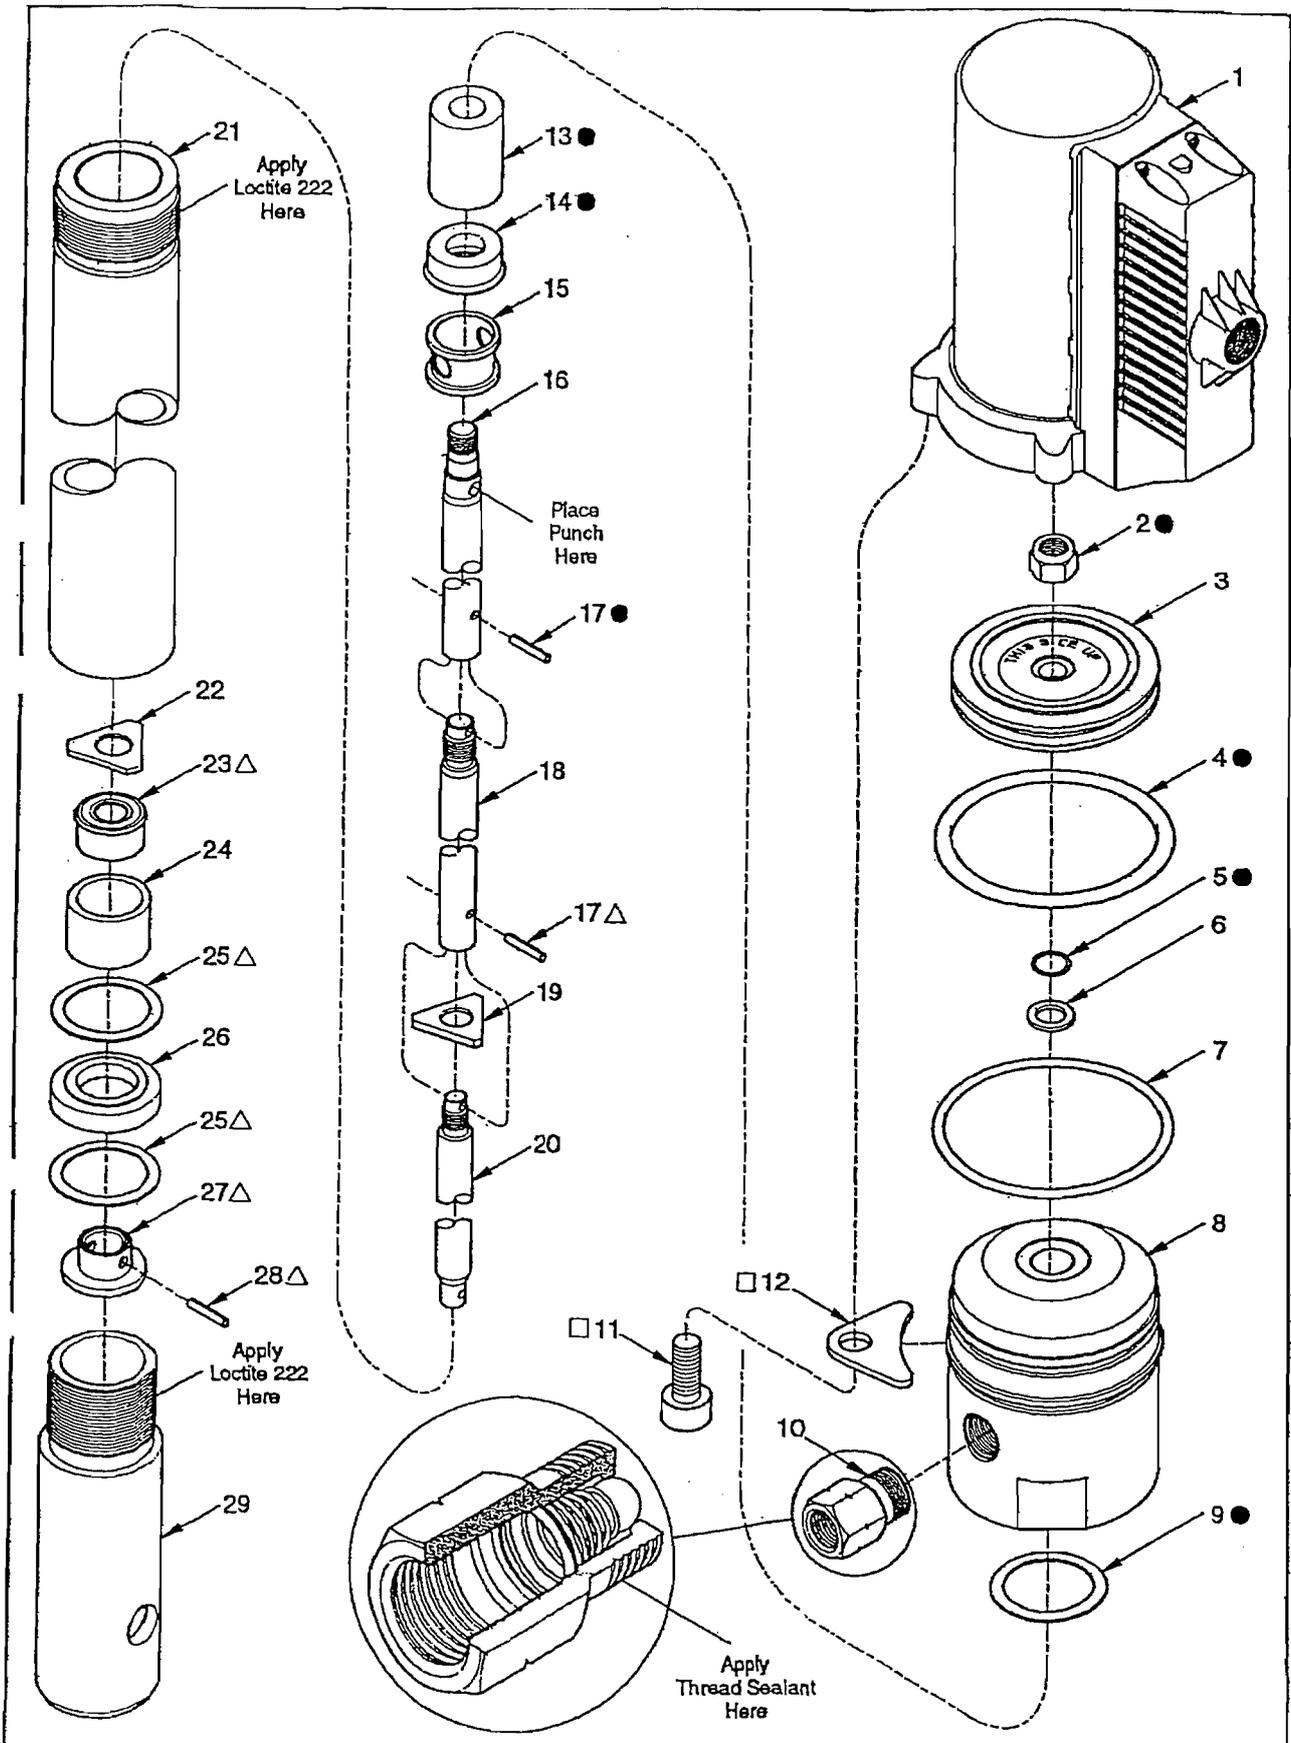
High-Pressure Stripped Pump Models 9611, 9650, and 338043-J1 - Exploded View
